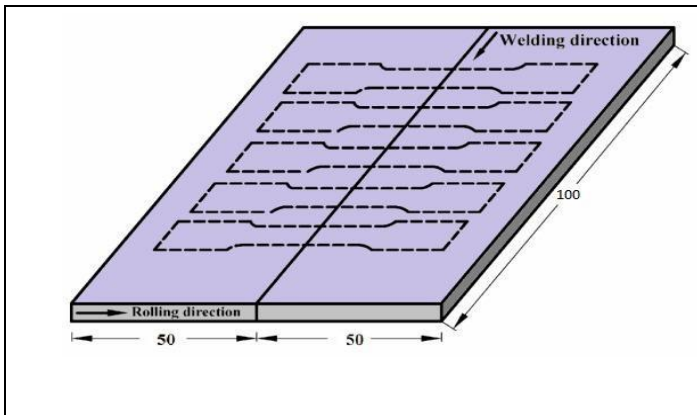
Scheme of welding with respect to rolling direction
